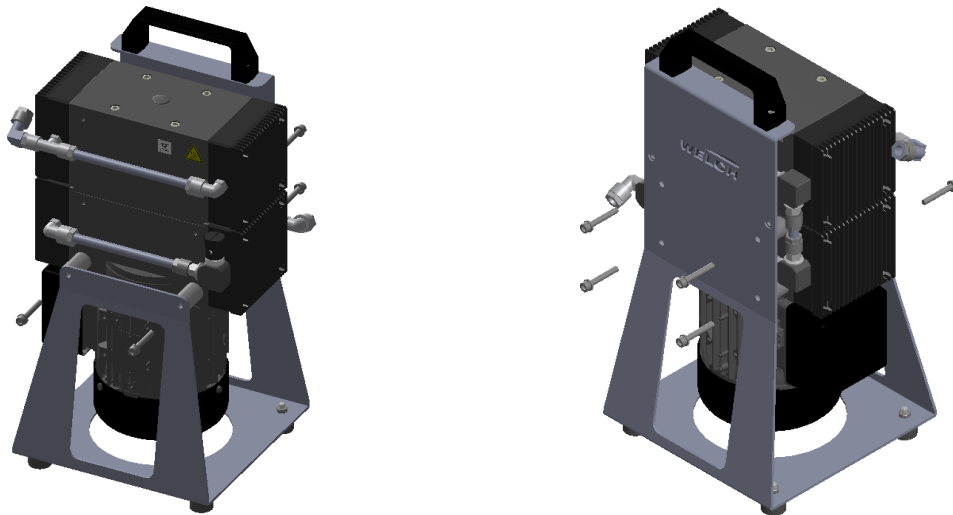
Loosening the screw connections: rear(left), front (right)
